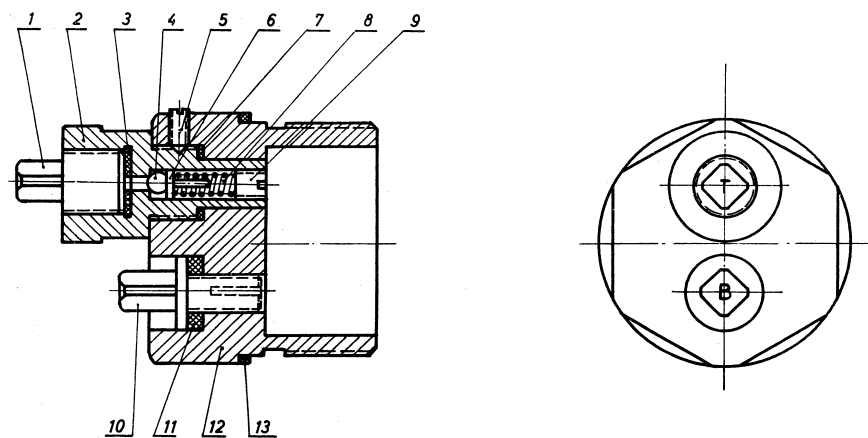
FLUID ADDING VALVE BOX — RECOIL BRAKE
